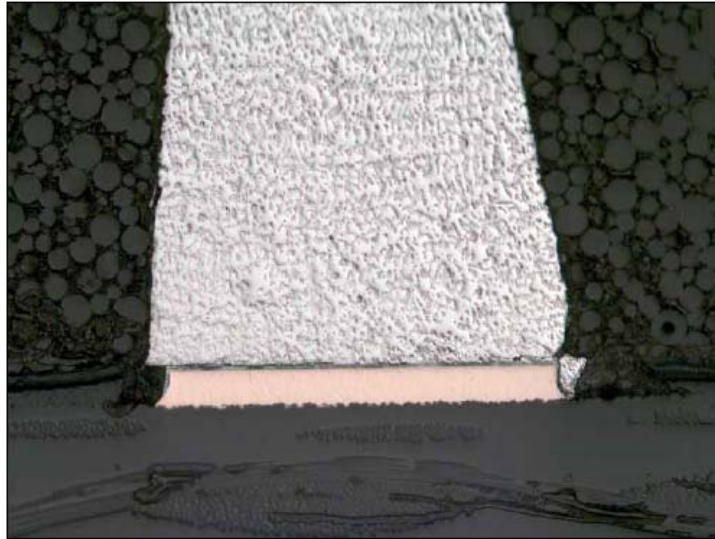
A failed solder joint on the only failed SAC sample. (100X)
